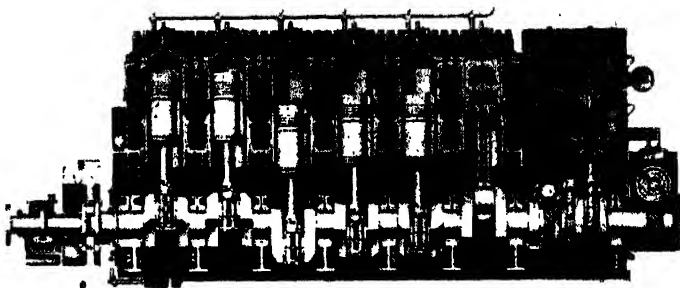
MARINE OIL ENGINE. Cross-sectional illustration of a large marine two-cycle oil engine.
